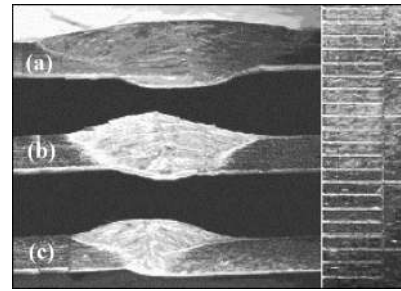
Typical geometry of the continuous current GMA weld joints at the heat inputs of (a) 8.84 kJ/cm, (b) 6.66 kJ/cm and (c) 4.22 kJ/cm.
